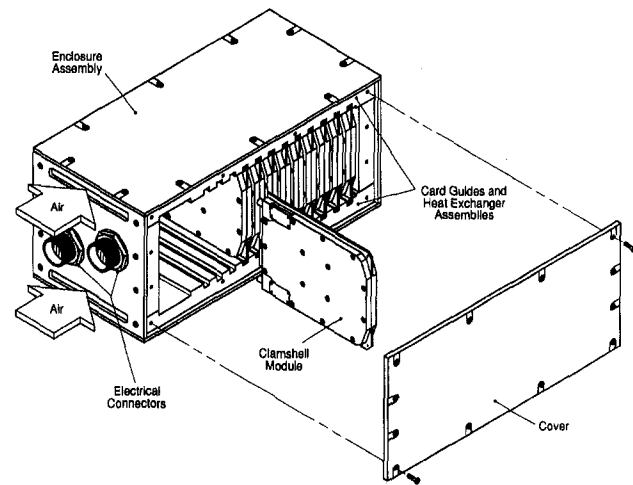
Mounting of clamshell modules in an avionics enclosure
